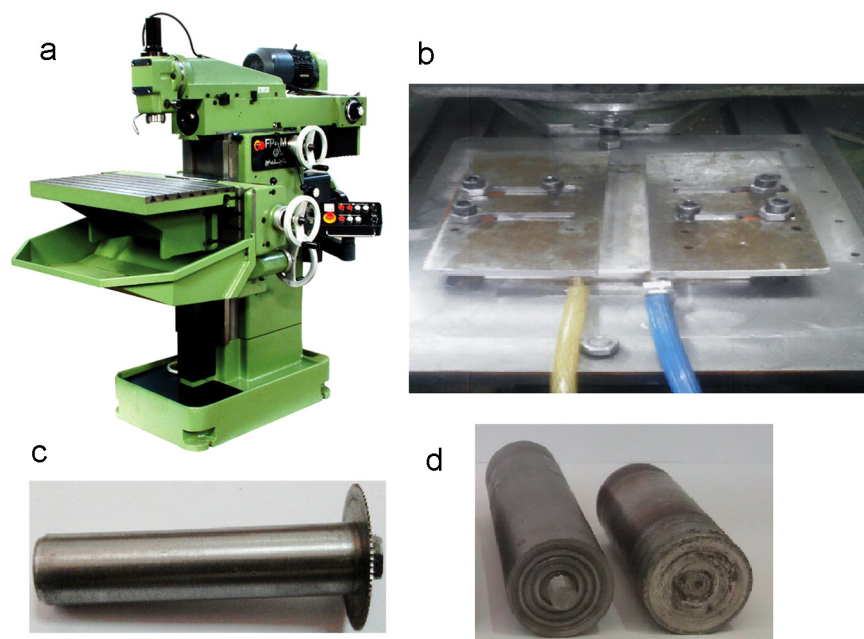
(a) The universal milling machine which is used for FSP, (b) attributed fixture, (c) radial cutting saw which is used for milling the slots, (d) tool for closing the slots (right) and cylindrical FSP tool (left).
